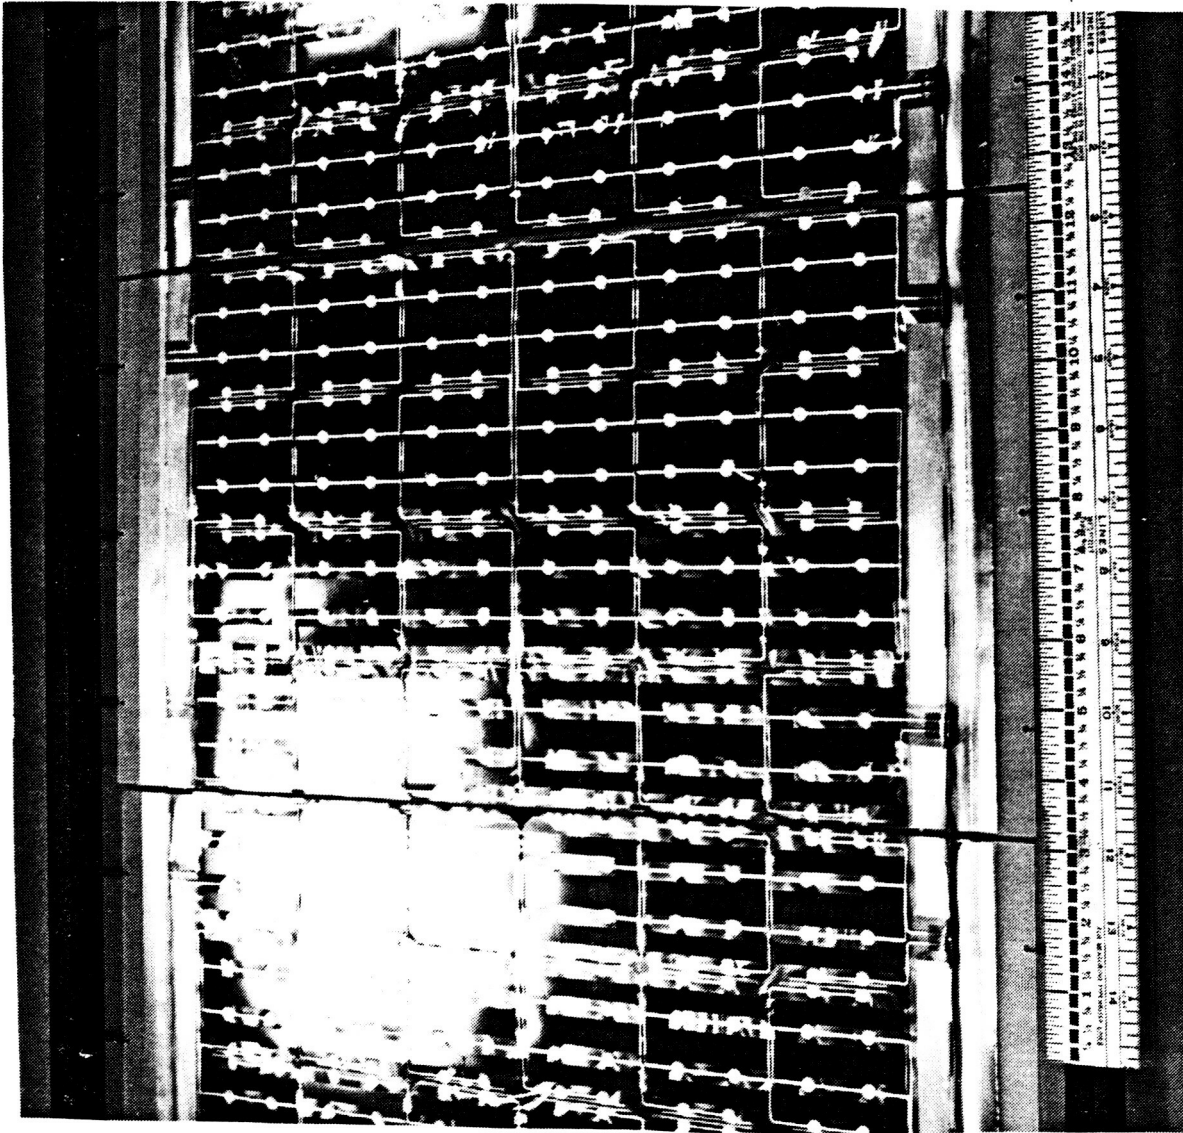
Closeup of Completed Superstrate Panel Segment
